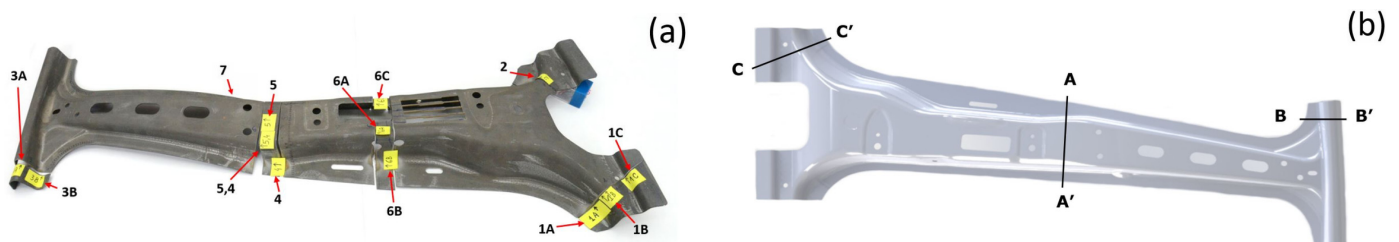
The method of sampling and marking the samples for the investigations (a) and locations of thickness measurements (b)
